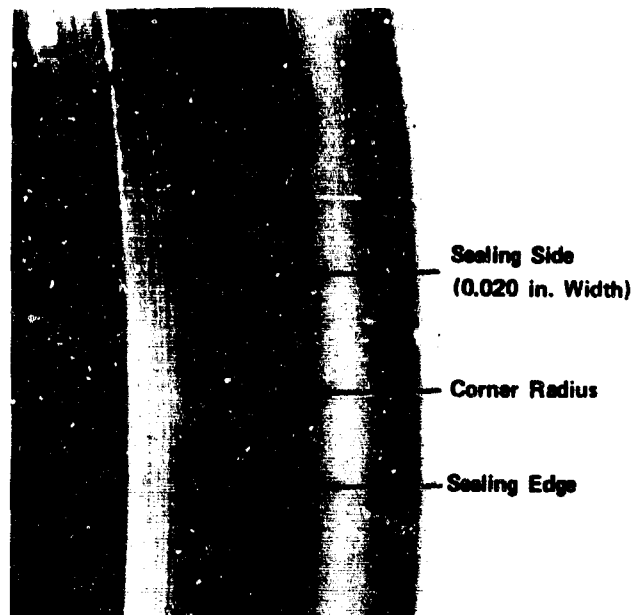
Build 38 Seal Side at Post-Test Inspection
